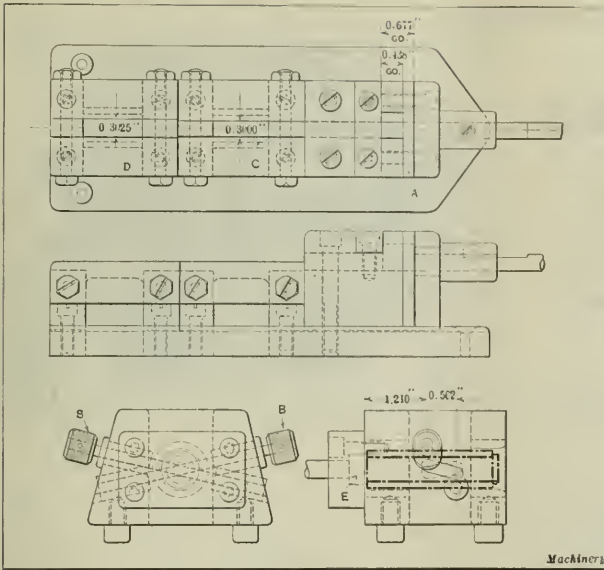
(Above) Detail View of the Roll Gage shown in Fig. 23. (Below) Gage used for testing the Spiral Slots in a Sleeve
